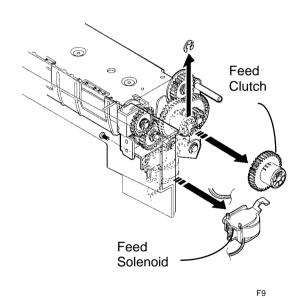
Removing the Tray 2 Feed Solenoid and Feed Clutch
